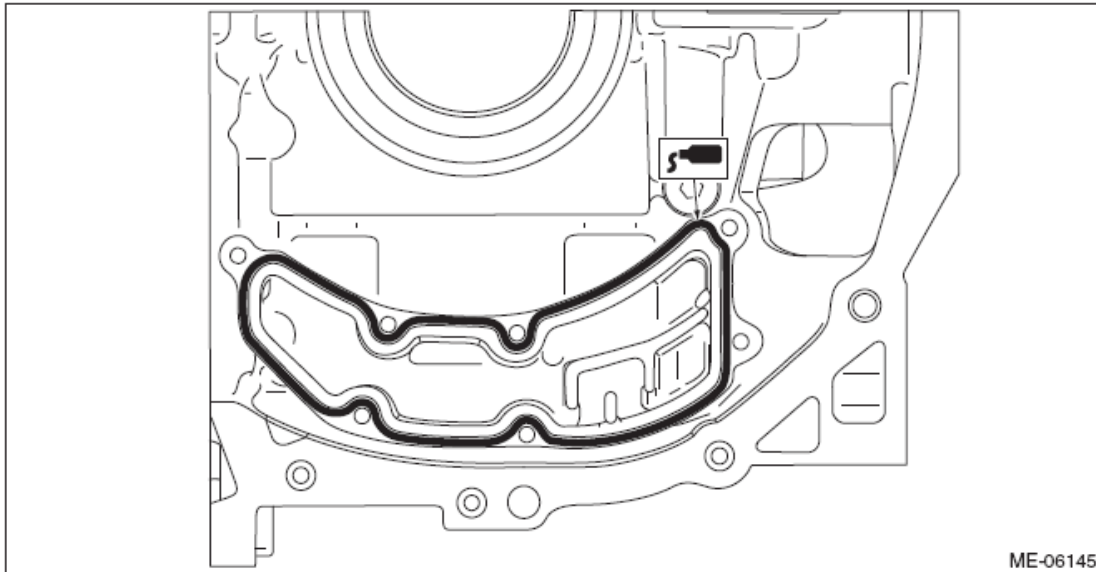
Identifying Oil Separator Cover Liquid Gasket Applying Area
